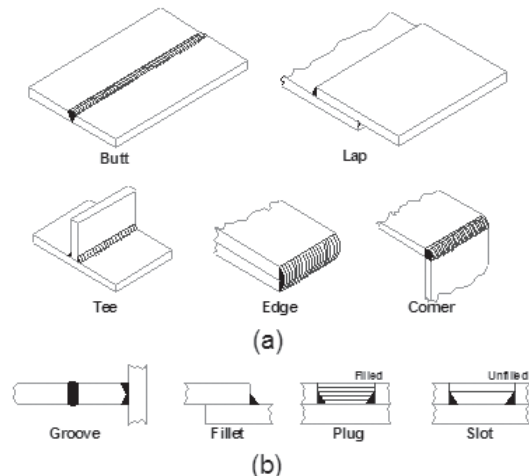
Welded connection: (a) types of joints (b) types of welds
